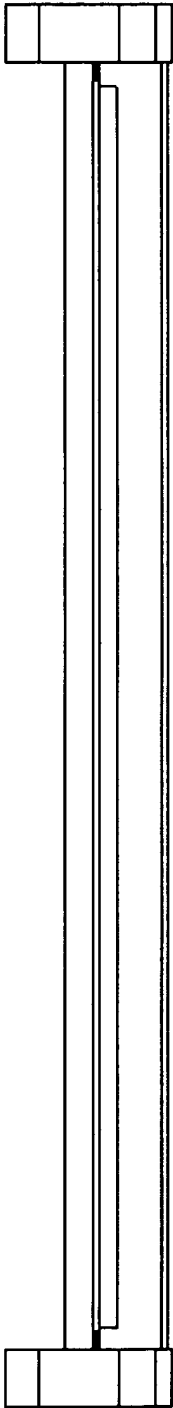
A: Right view of a floor frame (40 foot collapsible cargo container)
